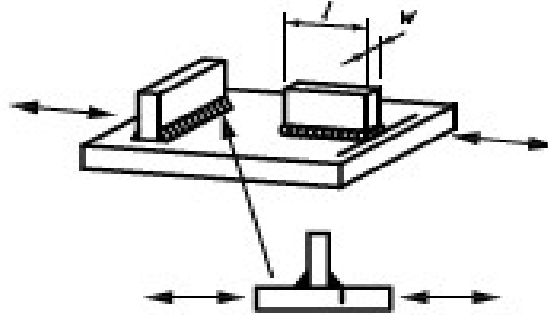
Loading details on welded attachment (BS7608, 2014)
